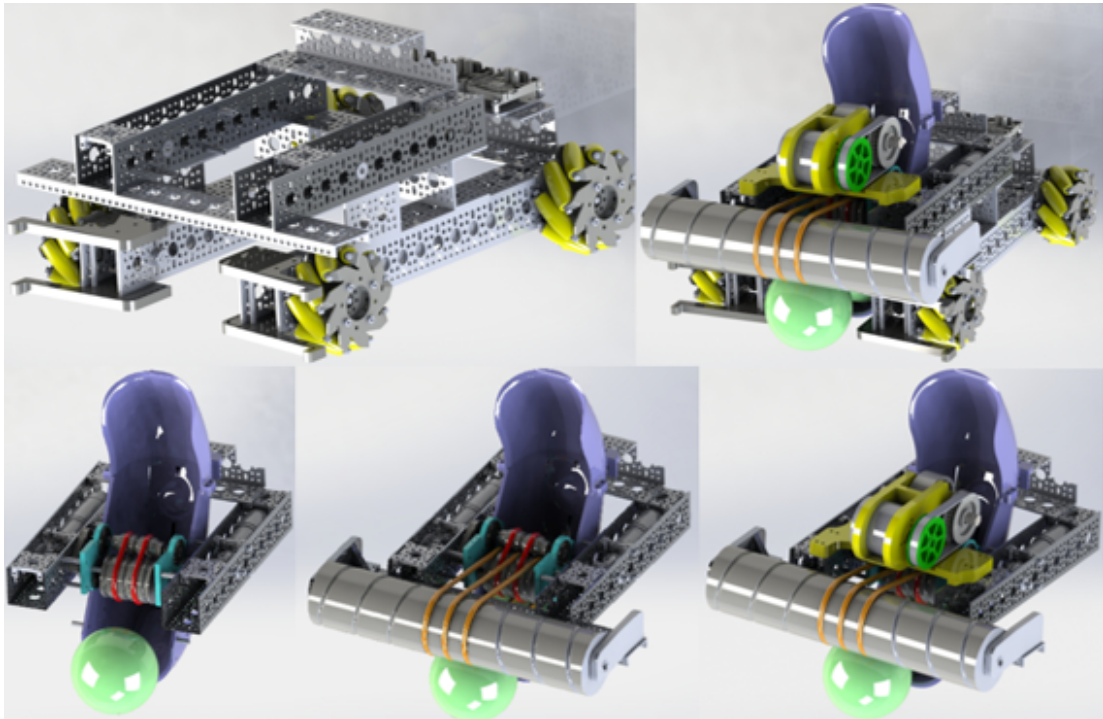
Mechanisms rendered in Solidworks: drive train and frame (top left), elevator (bottom left), intake (bottom middle), flywheel (bottom right) and full robot (top right)
